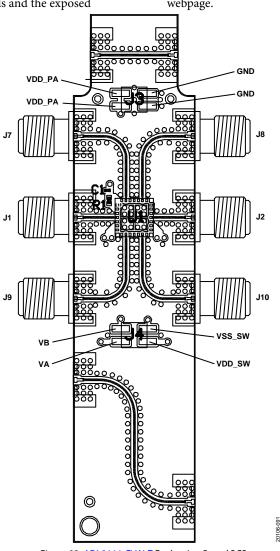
ADL8111-EVALZ Evaluation Board PCB
